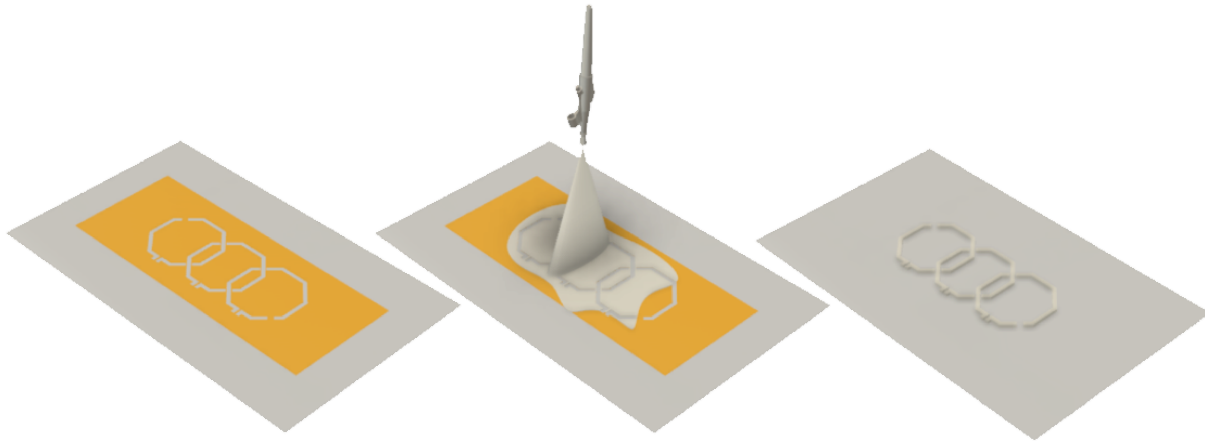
Spray coating conductive inks to form MRI receive coils on a flat plastic sheet. The inks are sprayed with a Badger 105 airbrush through a laser cut kapton mask.
